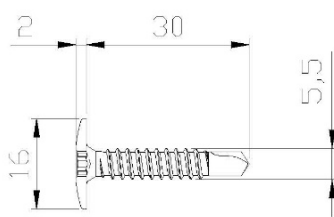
StoVentec FibreCement ALUMINIUM KIT – CLADDING FIXINGS
